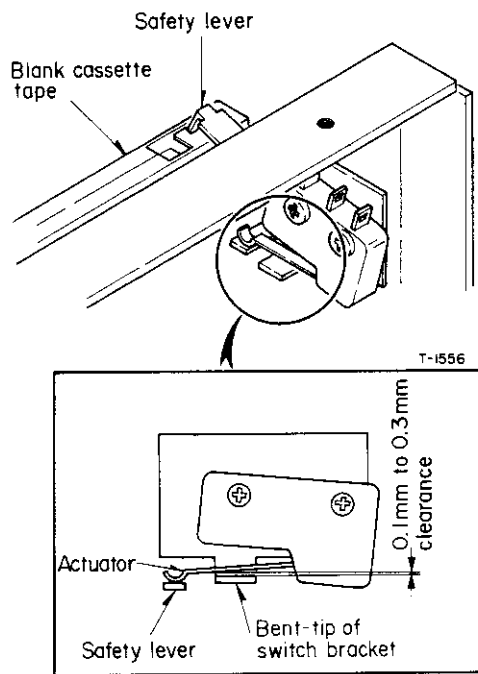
Micro Switch (A) Ass'y Clearance Adjustment
